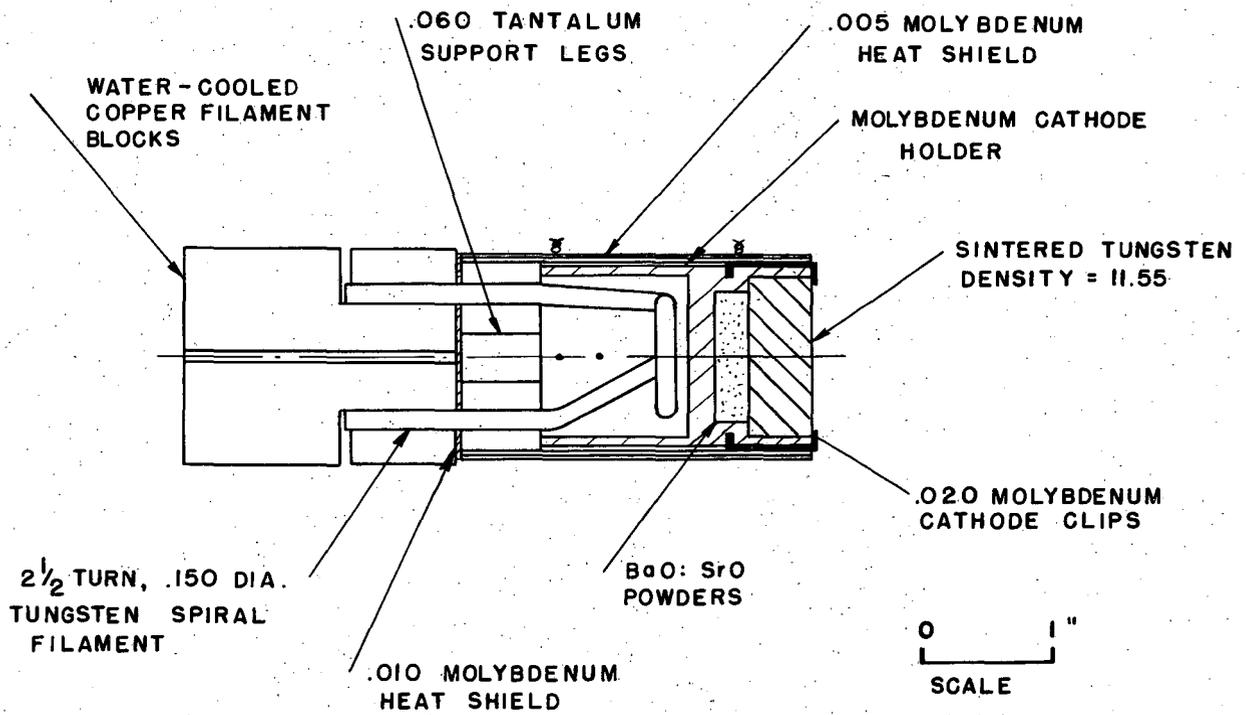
ASSEMBLY - 1/4" THICK DISC EMITTER
